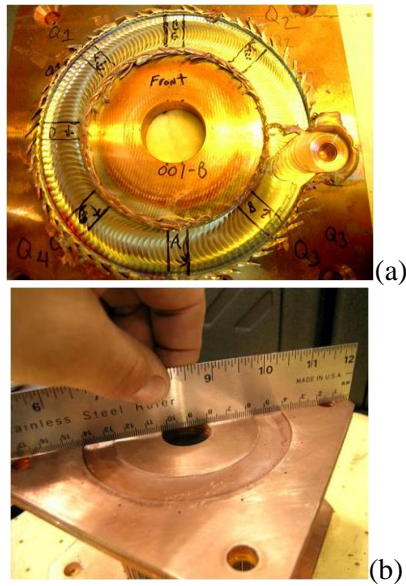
Circular weld run too hot showing (a) excessive flash and loss of material and (b) excessive distortion.
